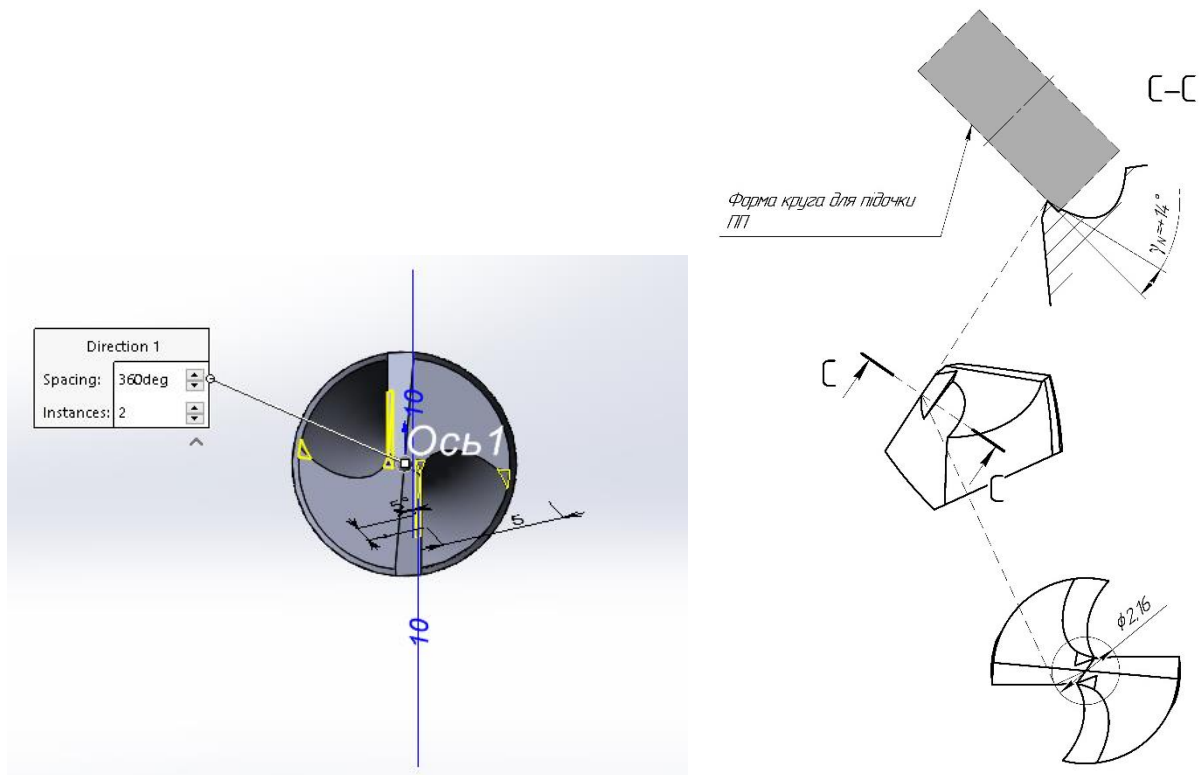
Installation of a wheel for forming a cutting-edge point
